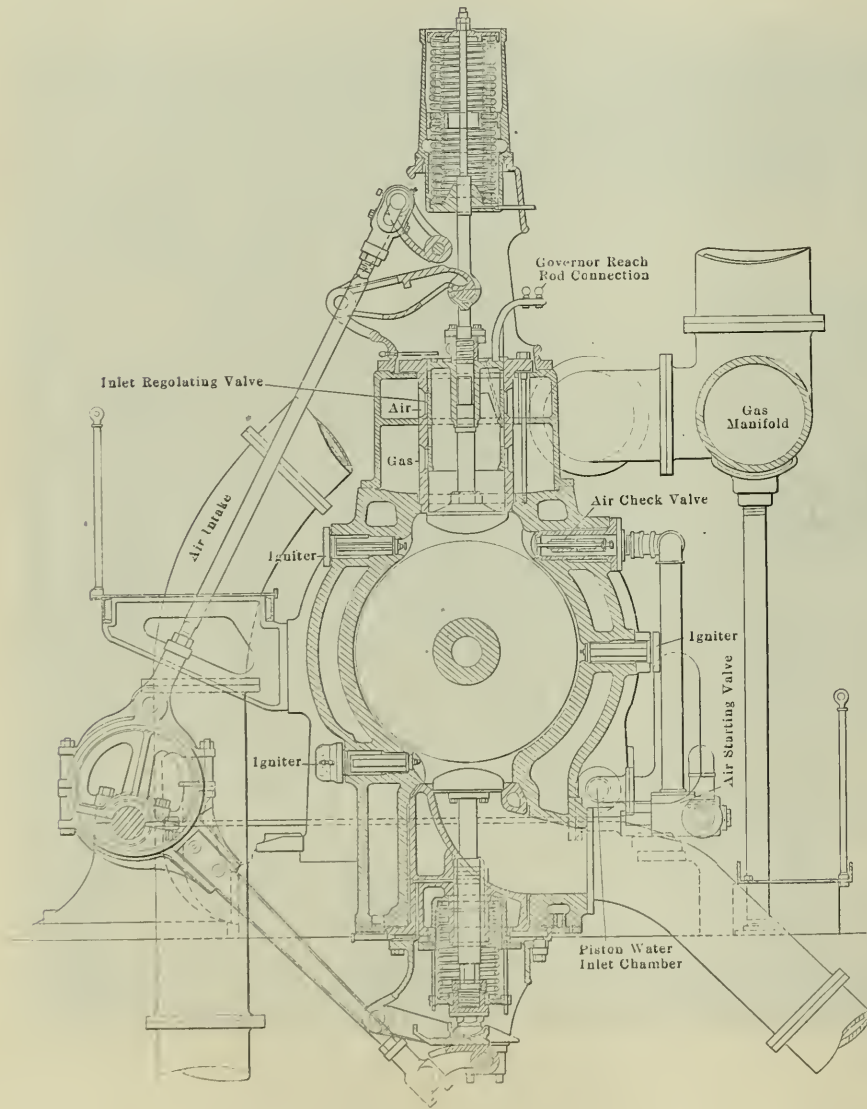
DETAIL CROSS-SECTION OF GAS ENGINE THROUGH VALVE CENTERS
